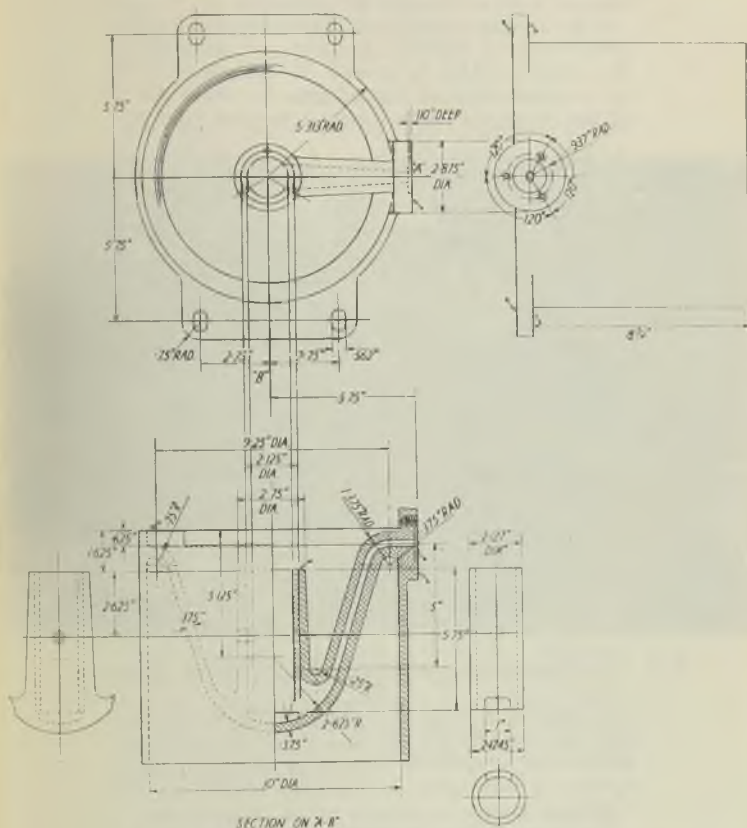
PLUNGER TYPE OF DIE-CASTING MACHINE.
